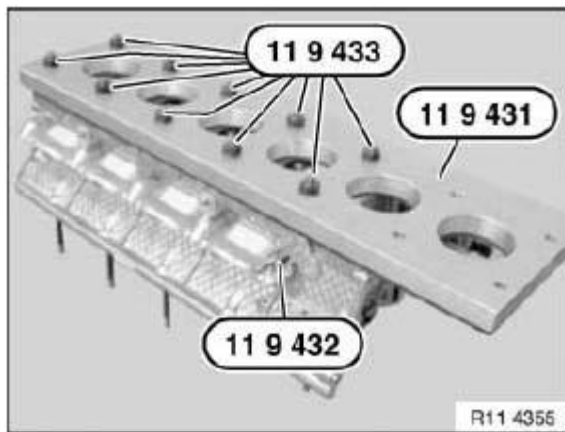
Identifying Special Tools On Cylinder Head Sealing Surface
